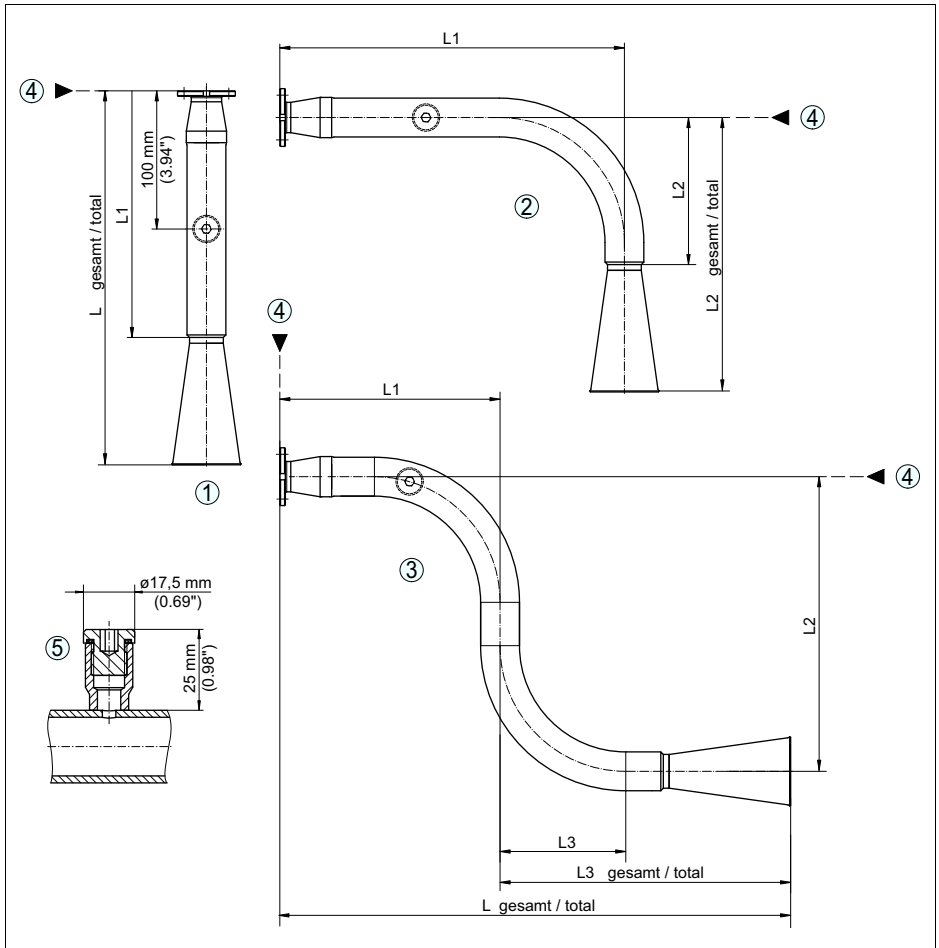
Extension single-sectional, welded horn antenna, dimensions depending on the order specification
